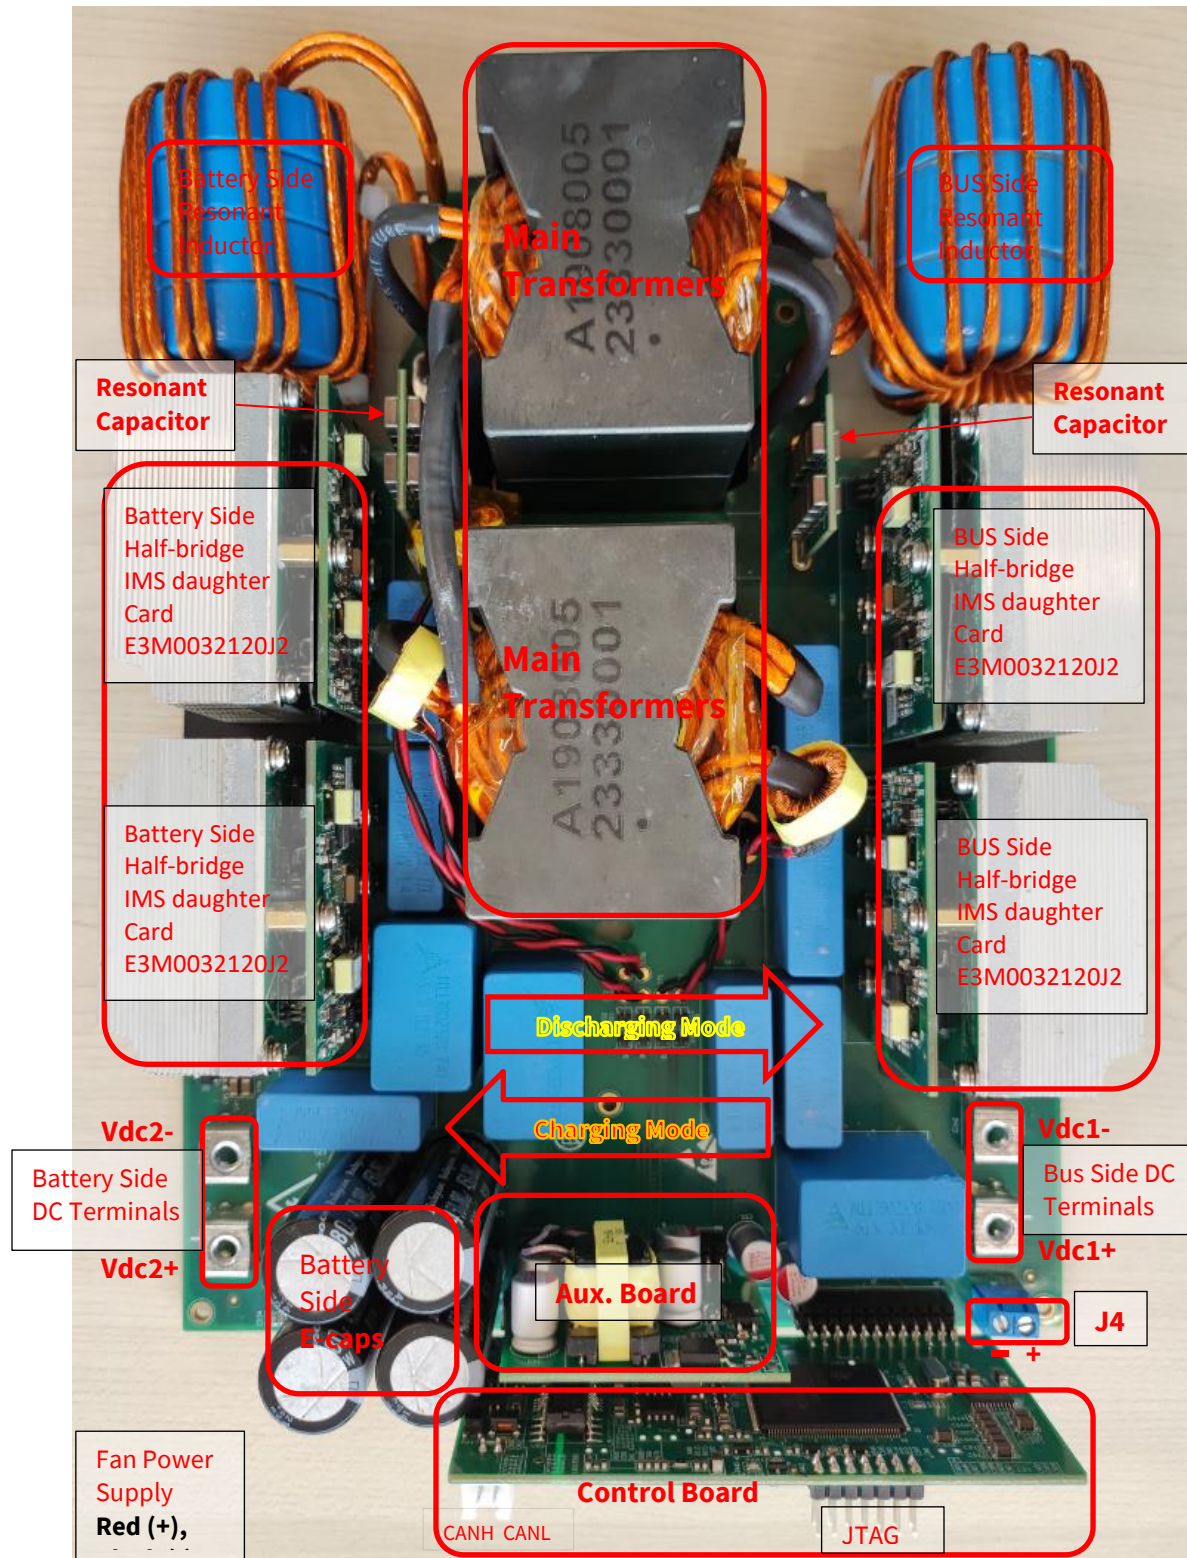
Top view of PCBAs (236 mm*180 mm*55 mm).
